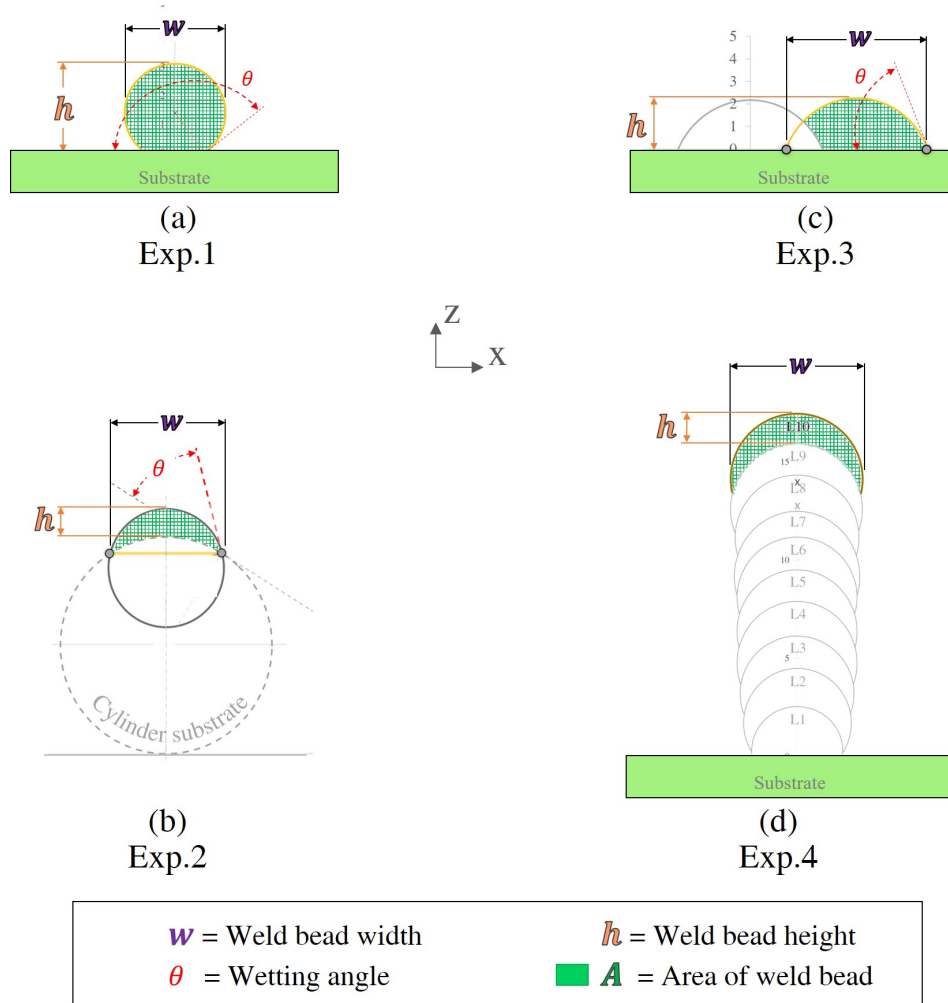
Definition of weld bead dimensions
